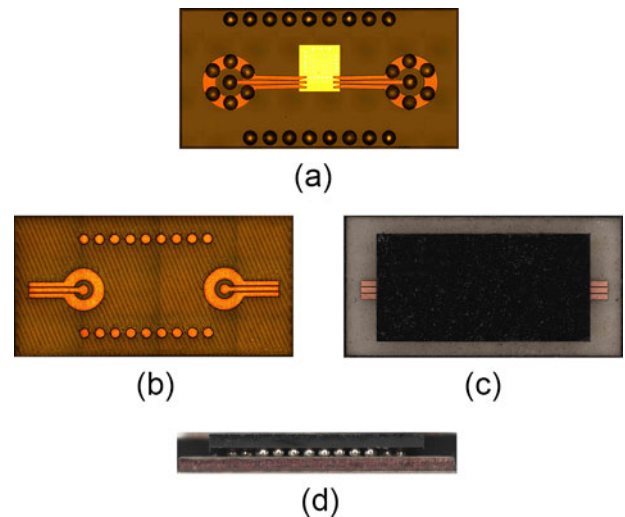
Complete chip-to-package-to-PCB chain with quasi-coaxial interconnect: (a) eWLB package; (b) PCB; (c) top view of assembled sample; and (d) side view of assembled sample.
